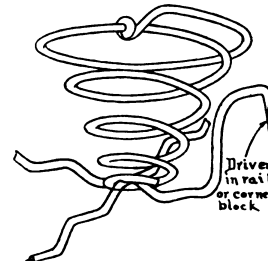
Shape of Springs Used in Modern Upholstering.
